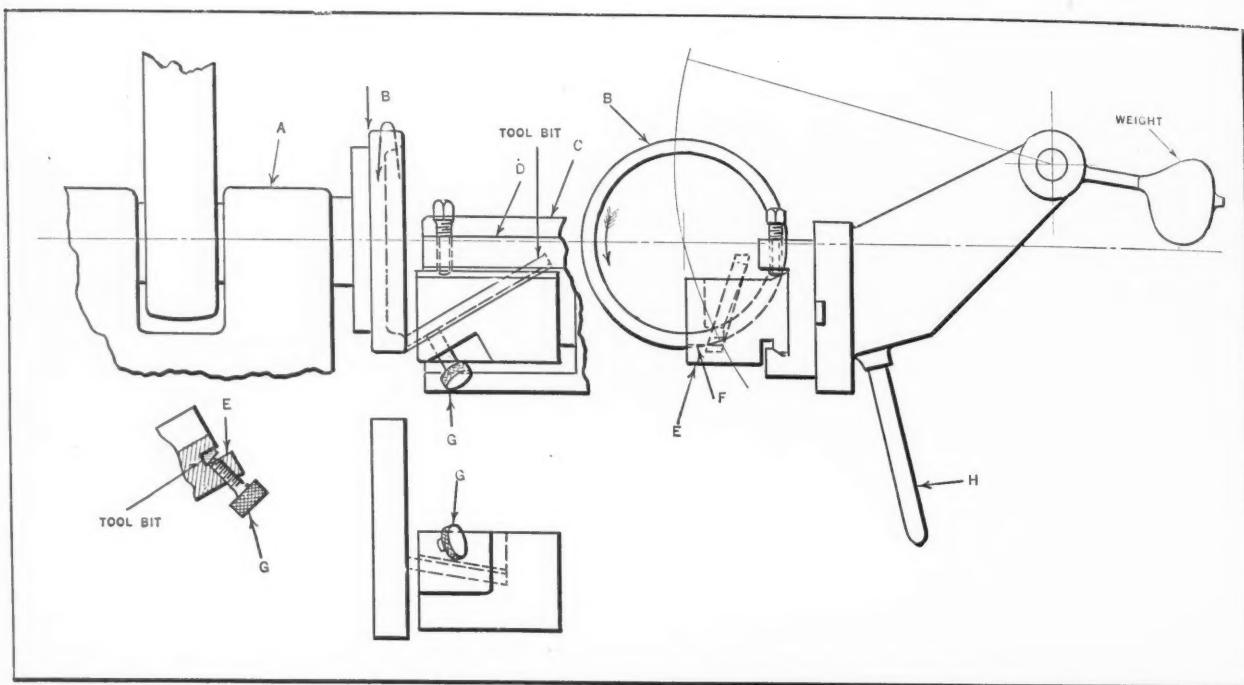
Equipment for Grinding Tool Bit B, Fig. 1
